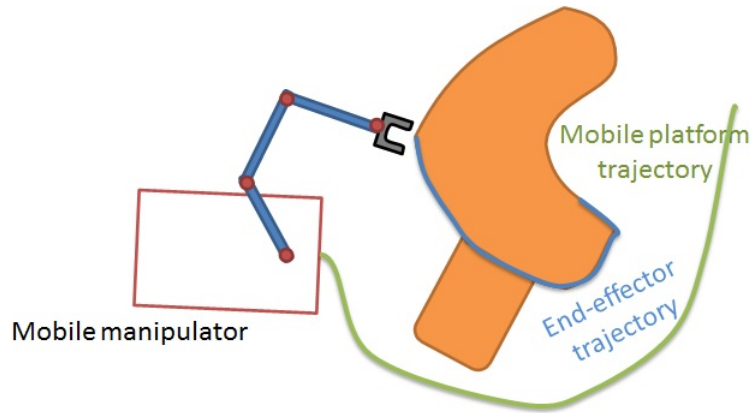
Schematic diagram of an, “assembly of large-scale parts by welding,” task.
